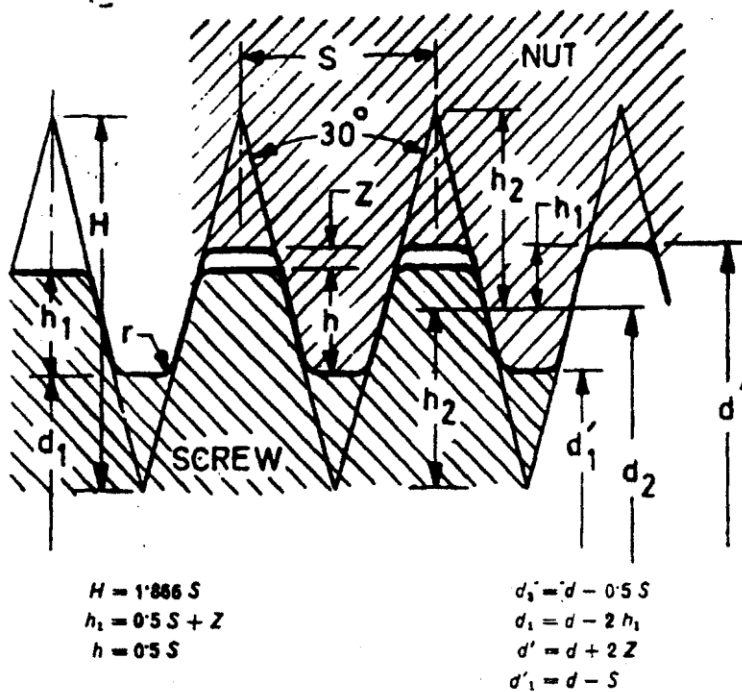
FORM OF TRAPEZOIDAL THREAD
